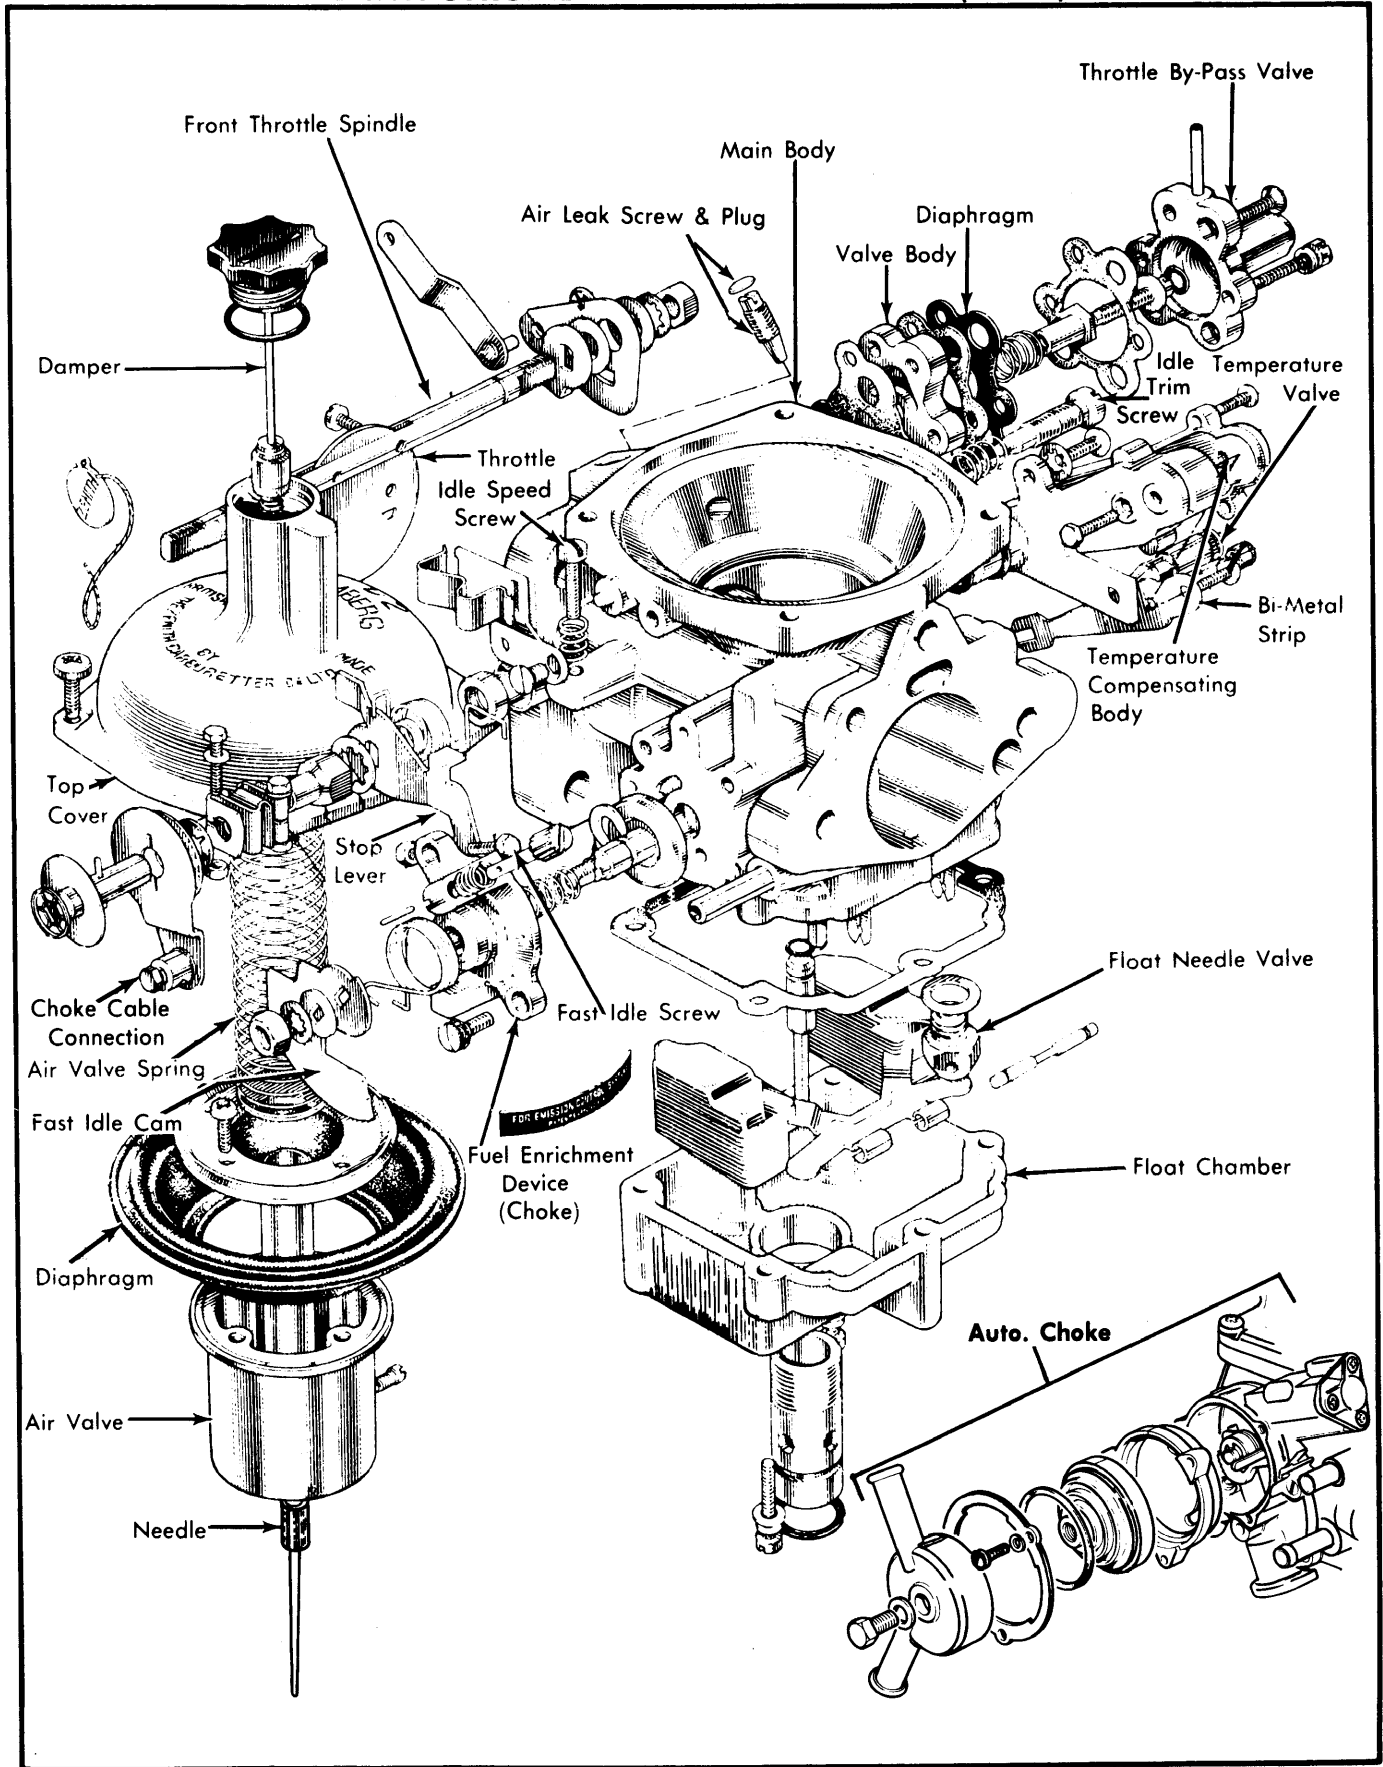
Exploded View of Stromberg 175 CDFVX Carburetor
